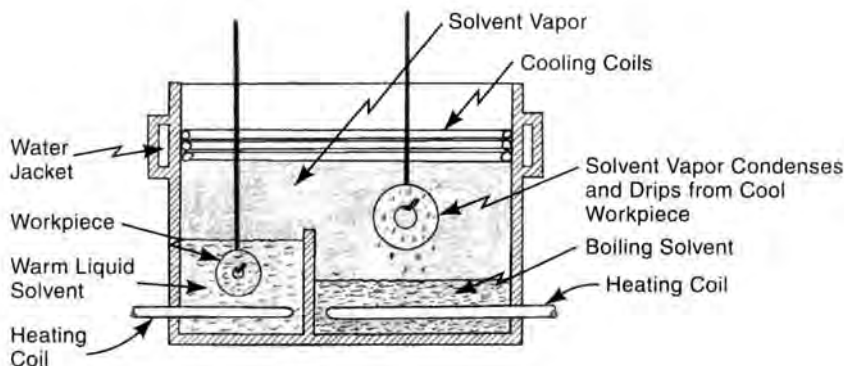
A2a3 A typical vapor degreaser shown in section view. Hot clean vapor condenses on room-temperature workpieces that have been lowered into the vapor, flushing off oils and dirt. More seriously soiled workpieces may first be immersed in the warm liquid solvent. Some degreasers also have a liquid solvent sprayer or a third tank of liquid solvent to aid in cleaning.
